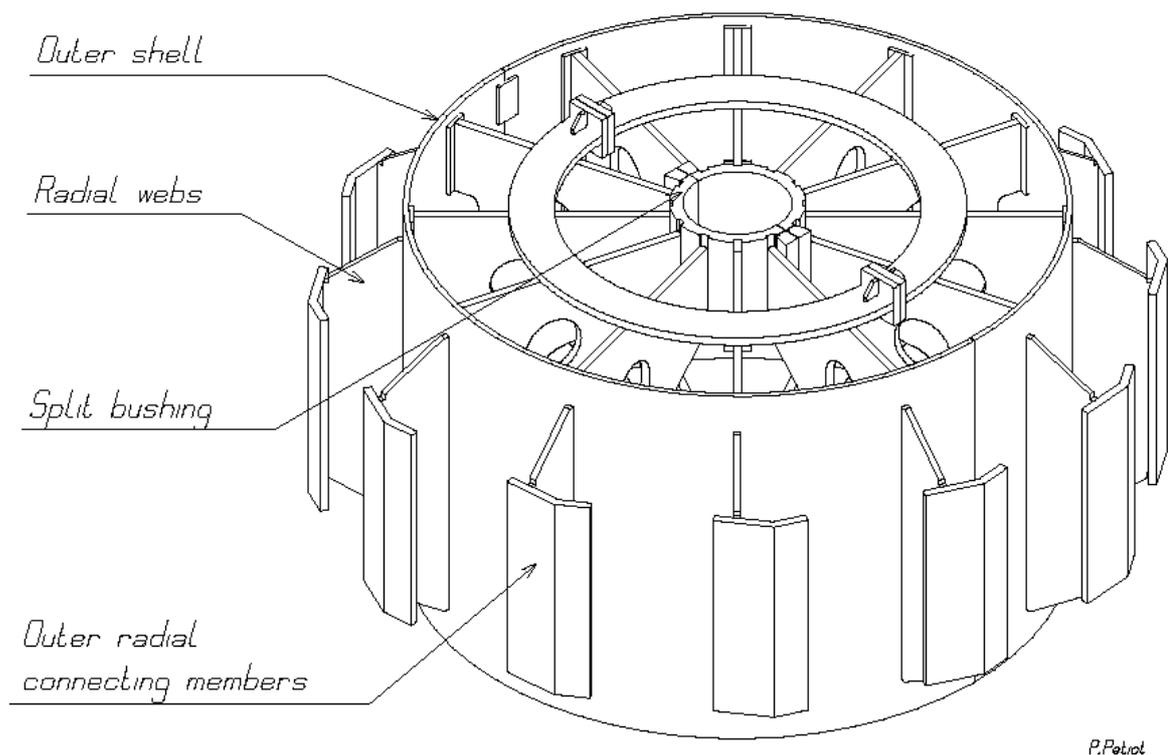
Central section of the outer shell. This will be used as assembly jig in the Ferris Wheel for the central barrel yoke.
